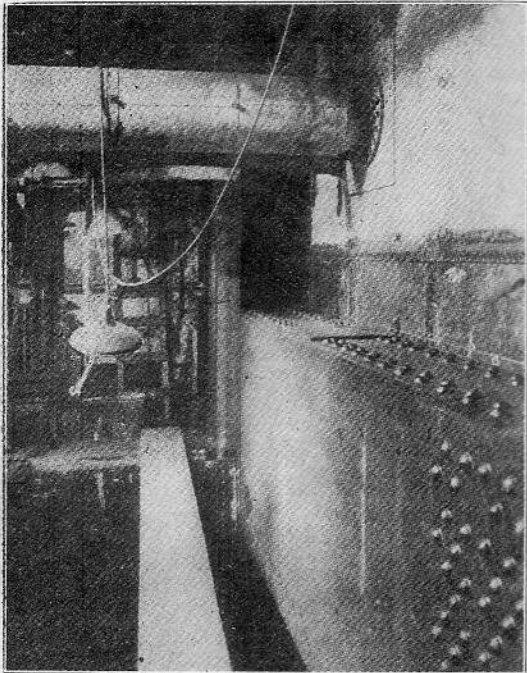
Hogging Test. Details of Connections between Transverse Girder and Supporting Partial Bulkheads, Port Side, Frames 77 and 78.
